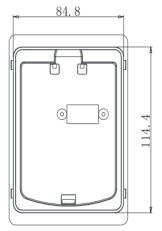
Dimensions of the Mounting Holes of the External Keyboard
